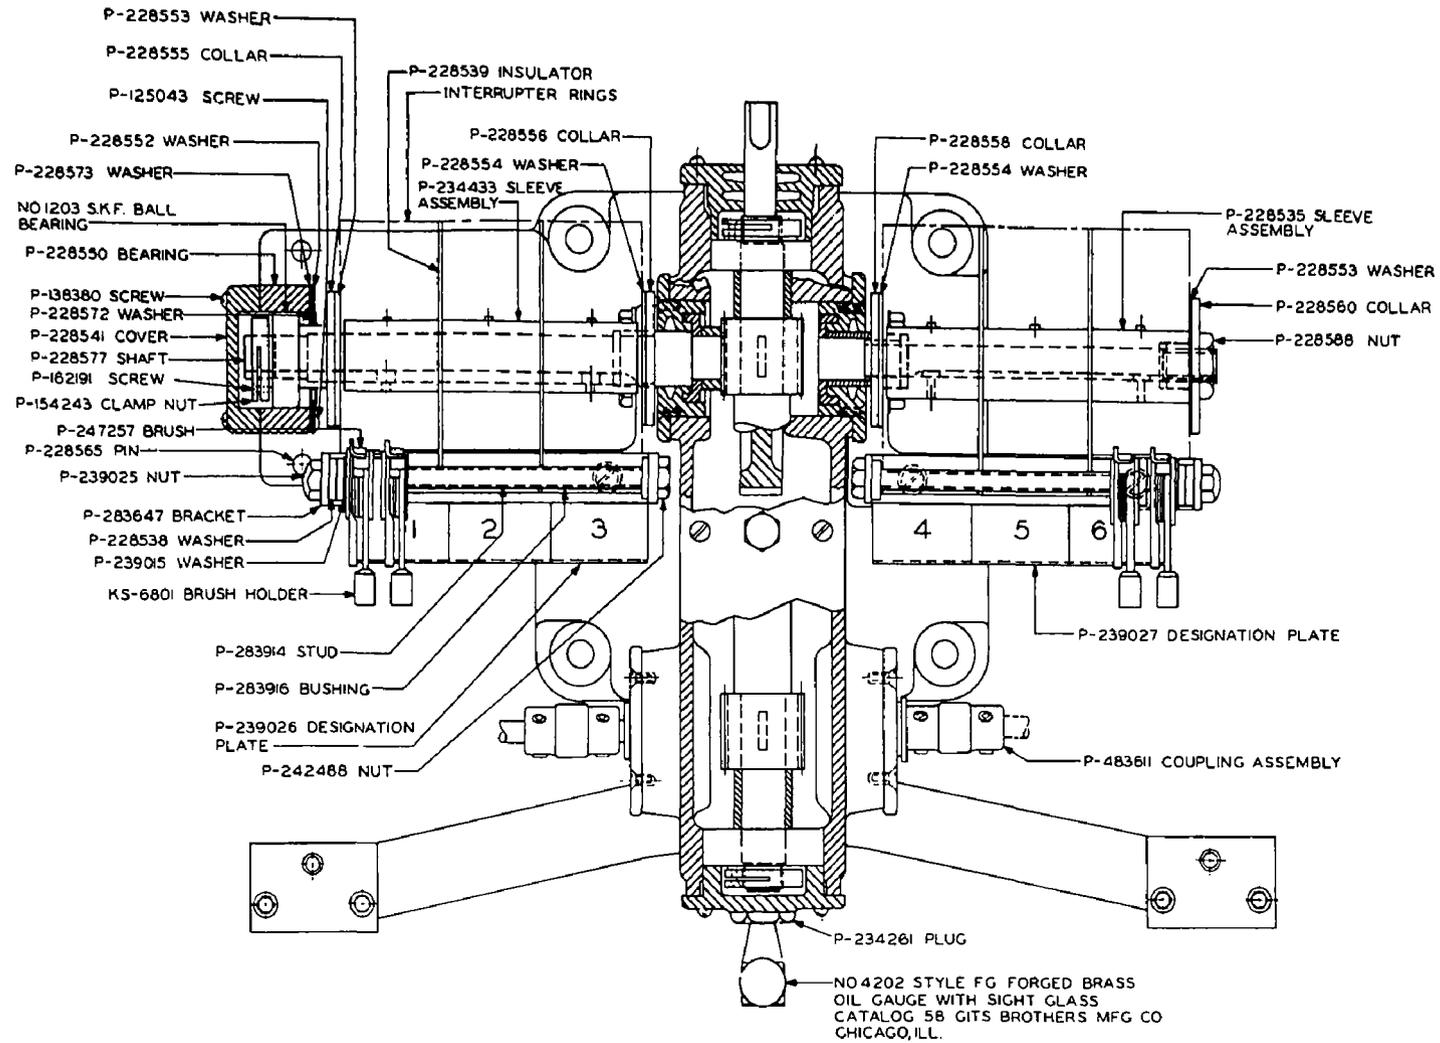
3B Interrupter Mounting—Top View (For End View See Fig. 14)
